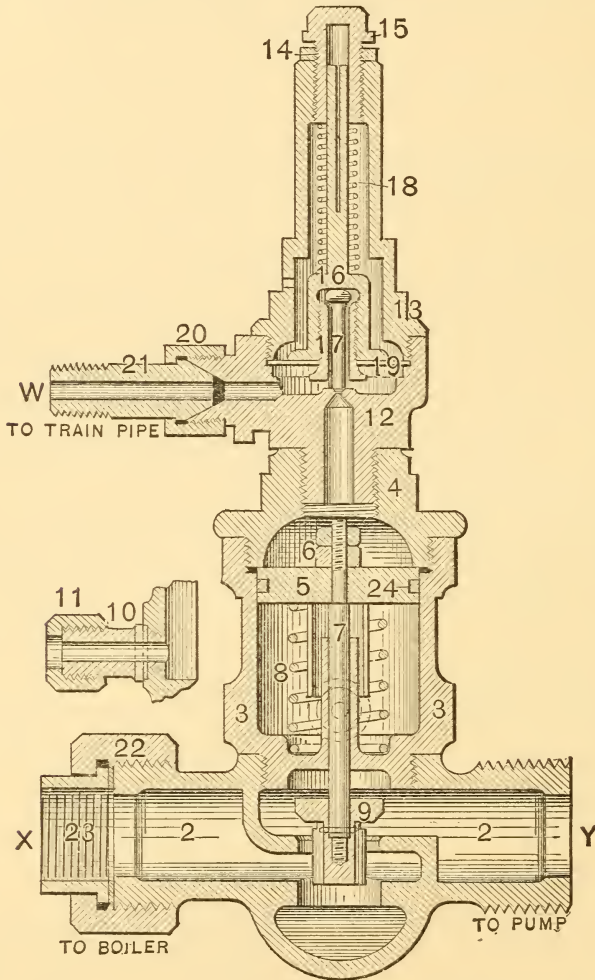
OLD STYLE PUMP GOVERNOR.
